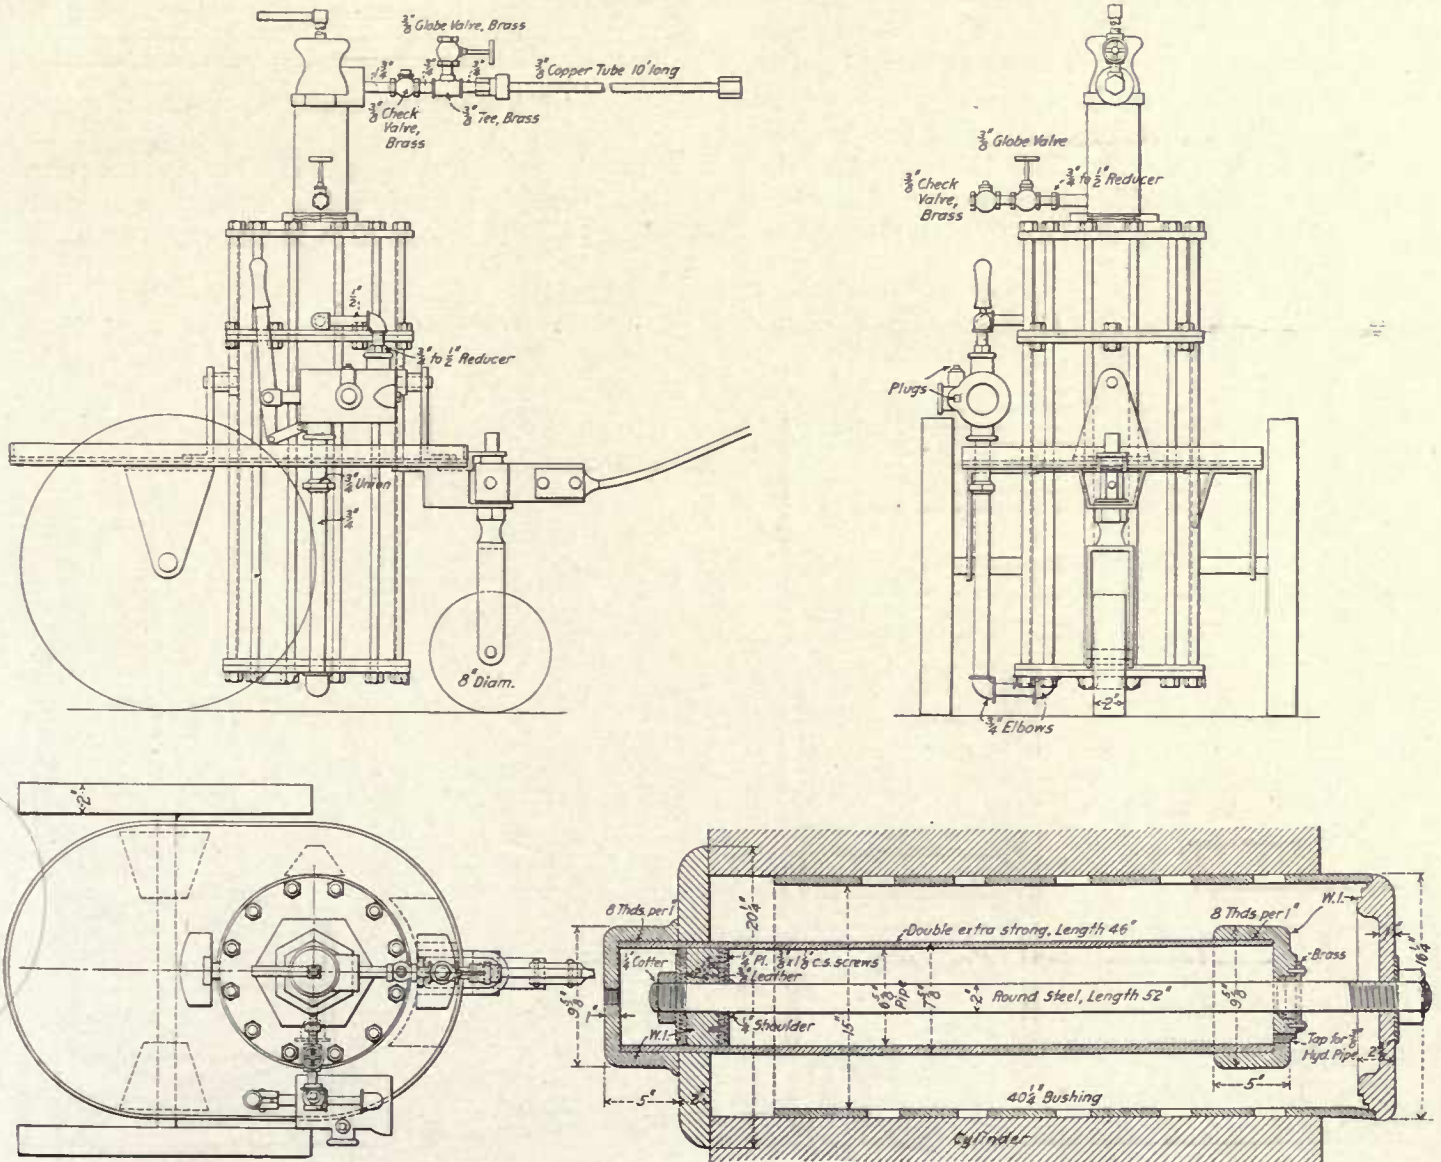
Hydraulic Press for Valve Chamber Bushings.
